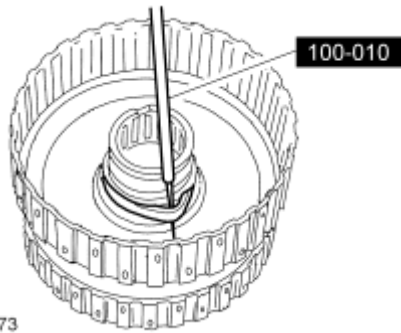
Installing/Removing Forward Clutch Piston Inner Seal On Forward/Coast/Direct Clutch Cylinder Assembly
